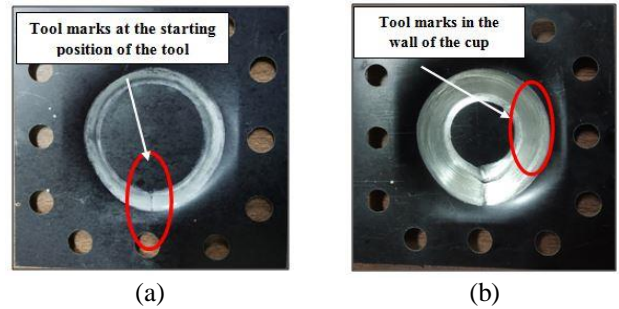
Tool markings for laser marked blanks in SPIF process: a) 0.5mm thick blank; b) 1.6mm thick blank
